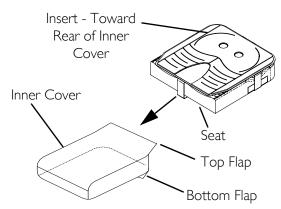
Removing Inner Cover - Installing Inner Cover
